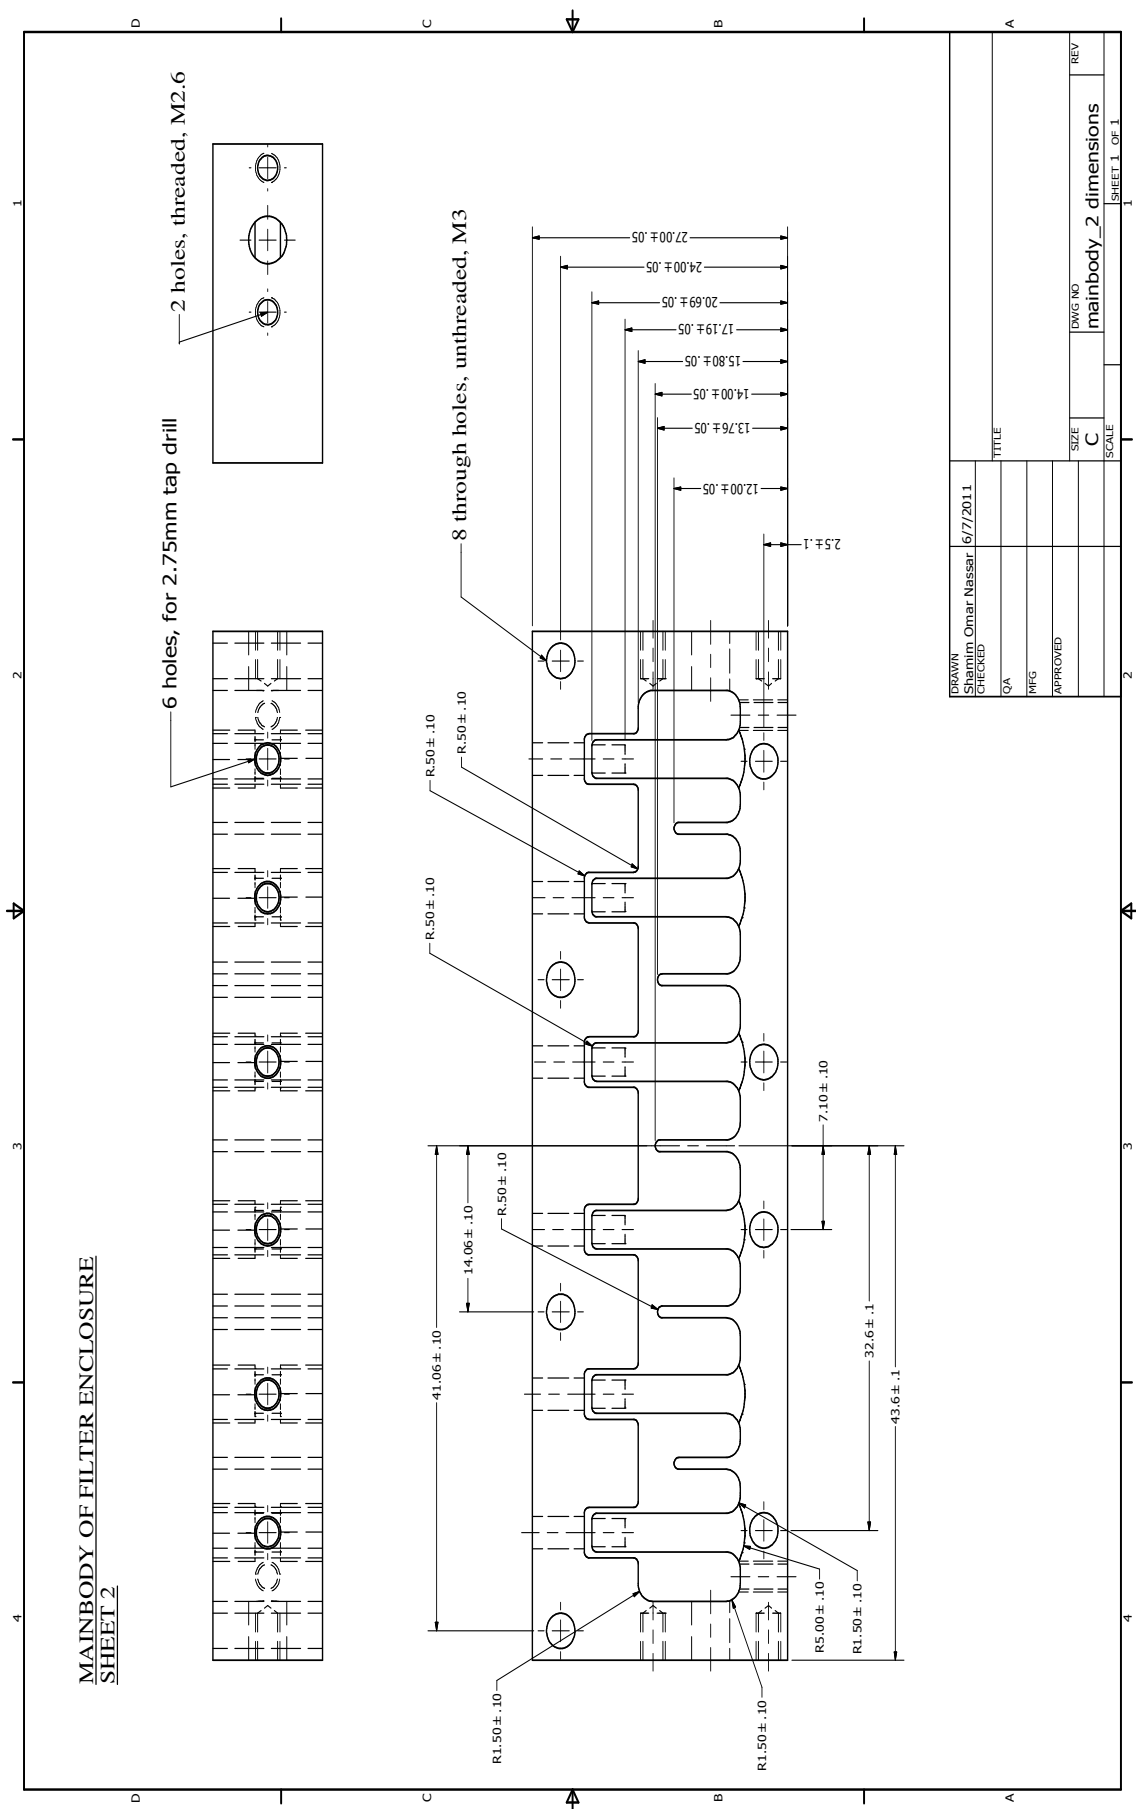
2.125GHz Combine Filter Main Body Dimensions - Sheet 2
